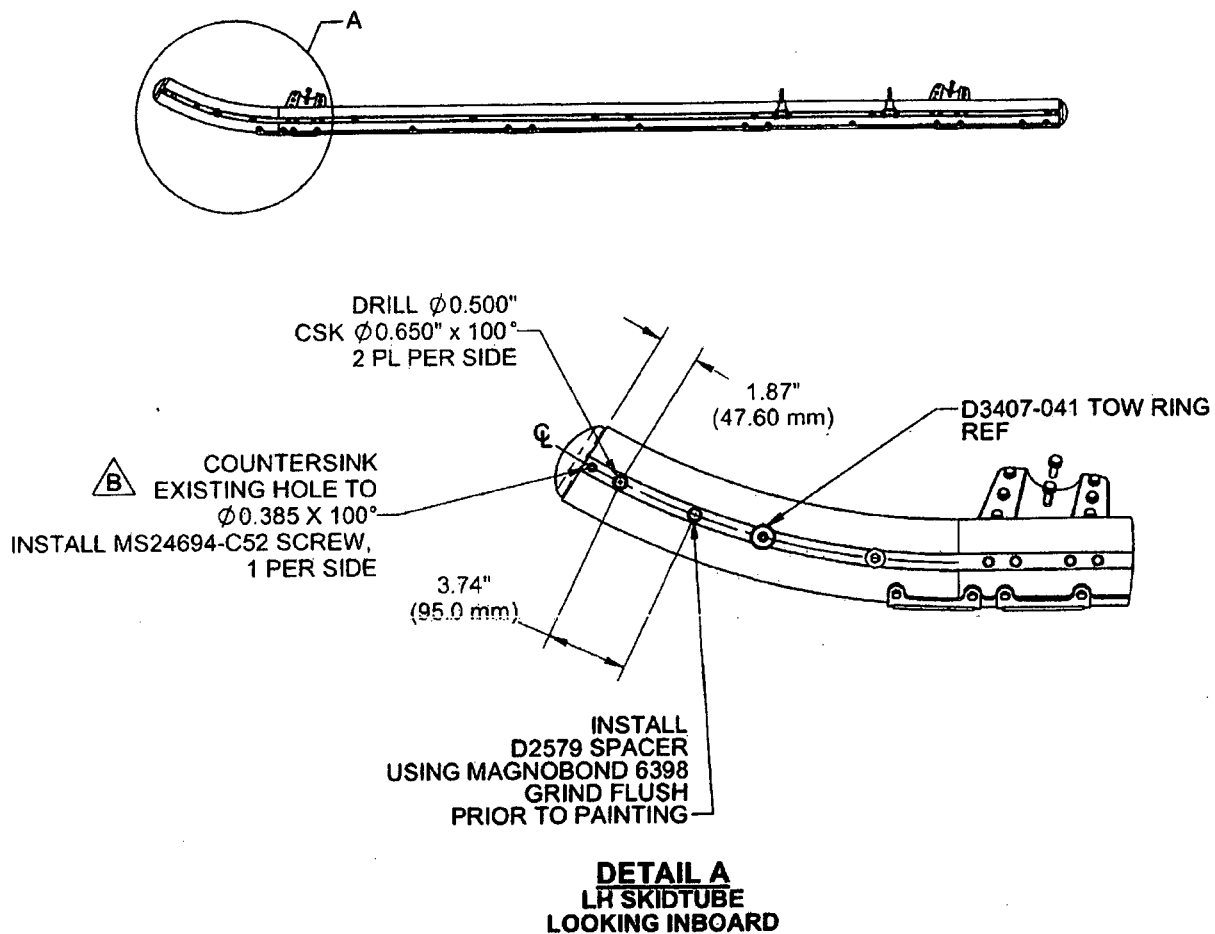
MODIFIED D119-646-XXX SKIDTUBE
